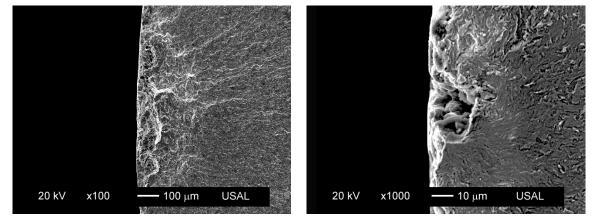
Initiation of fatigue crack growth from a surface defect: hot rolled bar (left) and prestressing steel wire (right). Both images represent the transverse fatigue fracture surface (circular section perpendicular to the wire axis or cold drawing direction) and crack growth direction takes place from left to right in the fractographs
